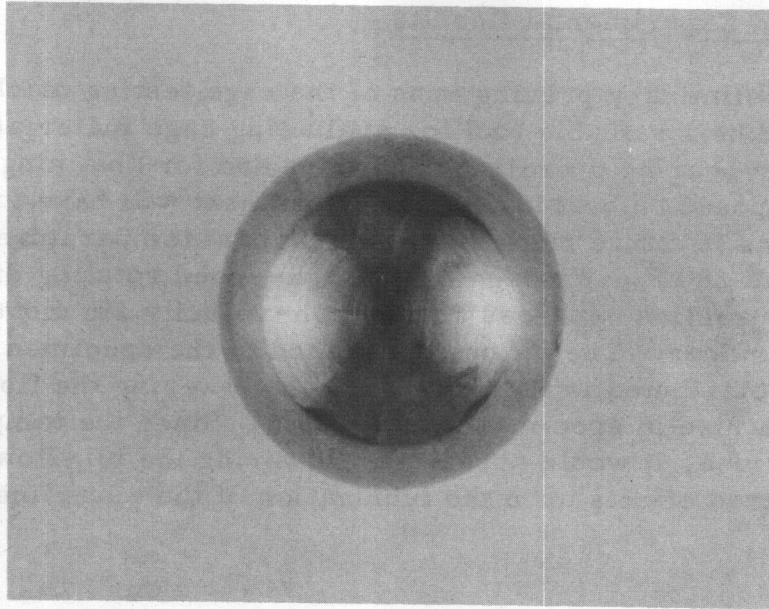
SAE 52100 STEEL BALL TAKEN FROM CAGE-MATERIAL TESTING MACHINE AFTER A 50-MINUTE RUN
